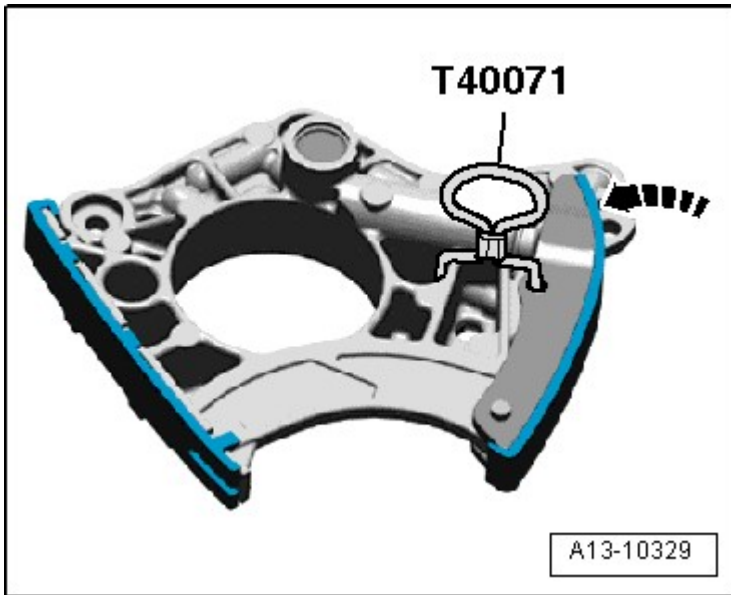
Pressing Left/Right Camshaft Timing Chain Guide Rail Inward And Securing Chain Tensioner With Locking Pin T40071
